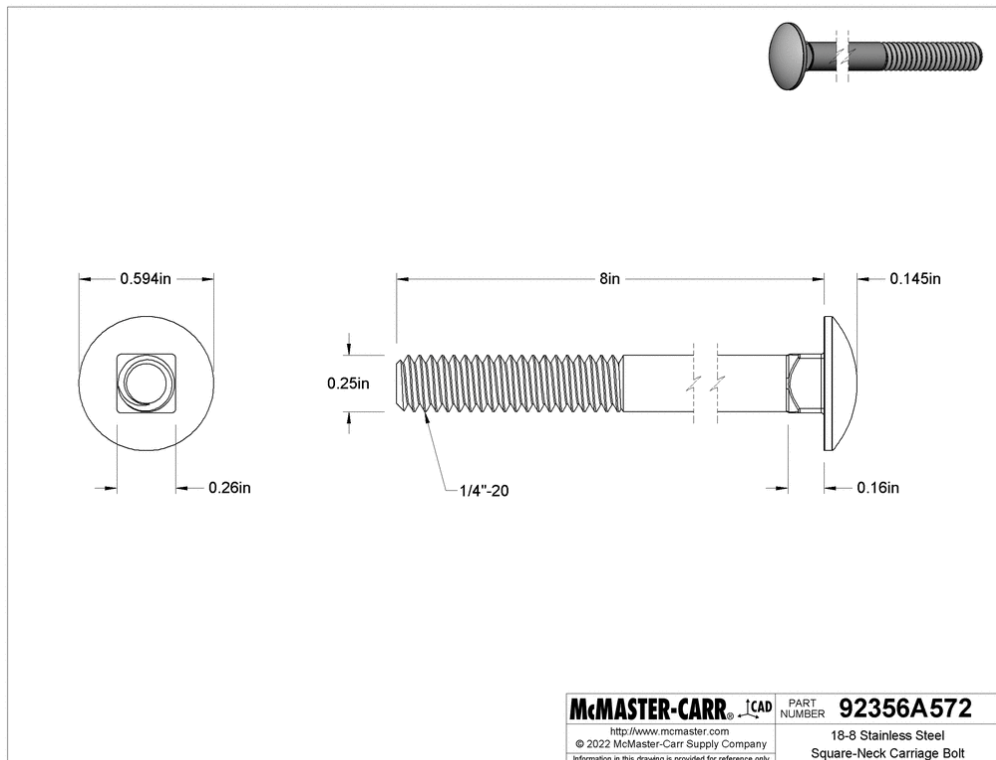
McMaster Carr 8" Stainless Steel Bolt Drawing
